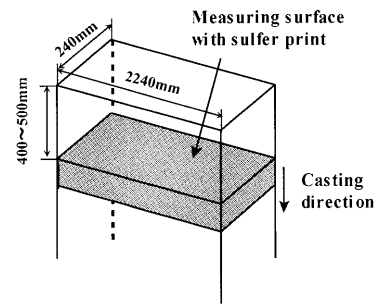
Schematic drawing of sampling position for sulfur addition test.
